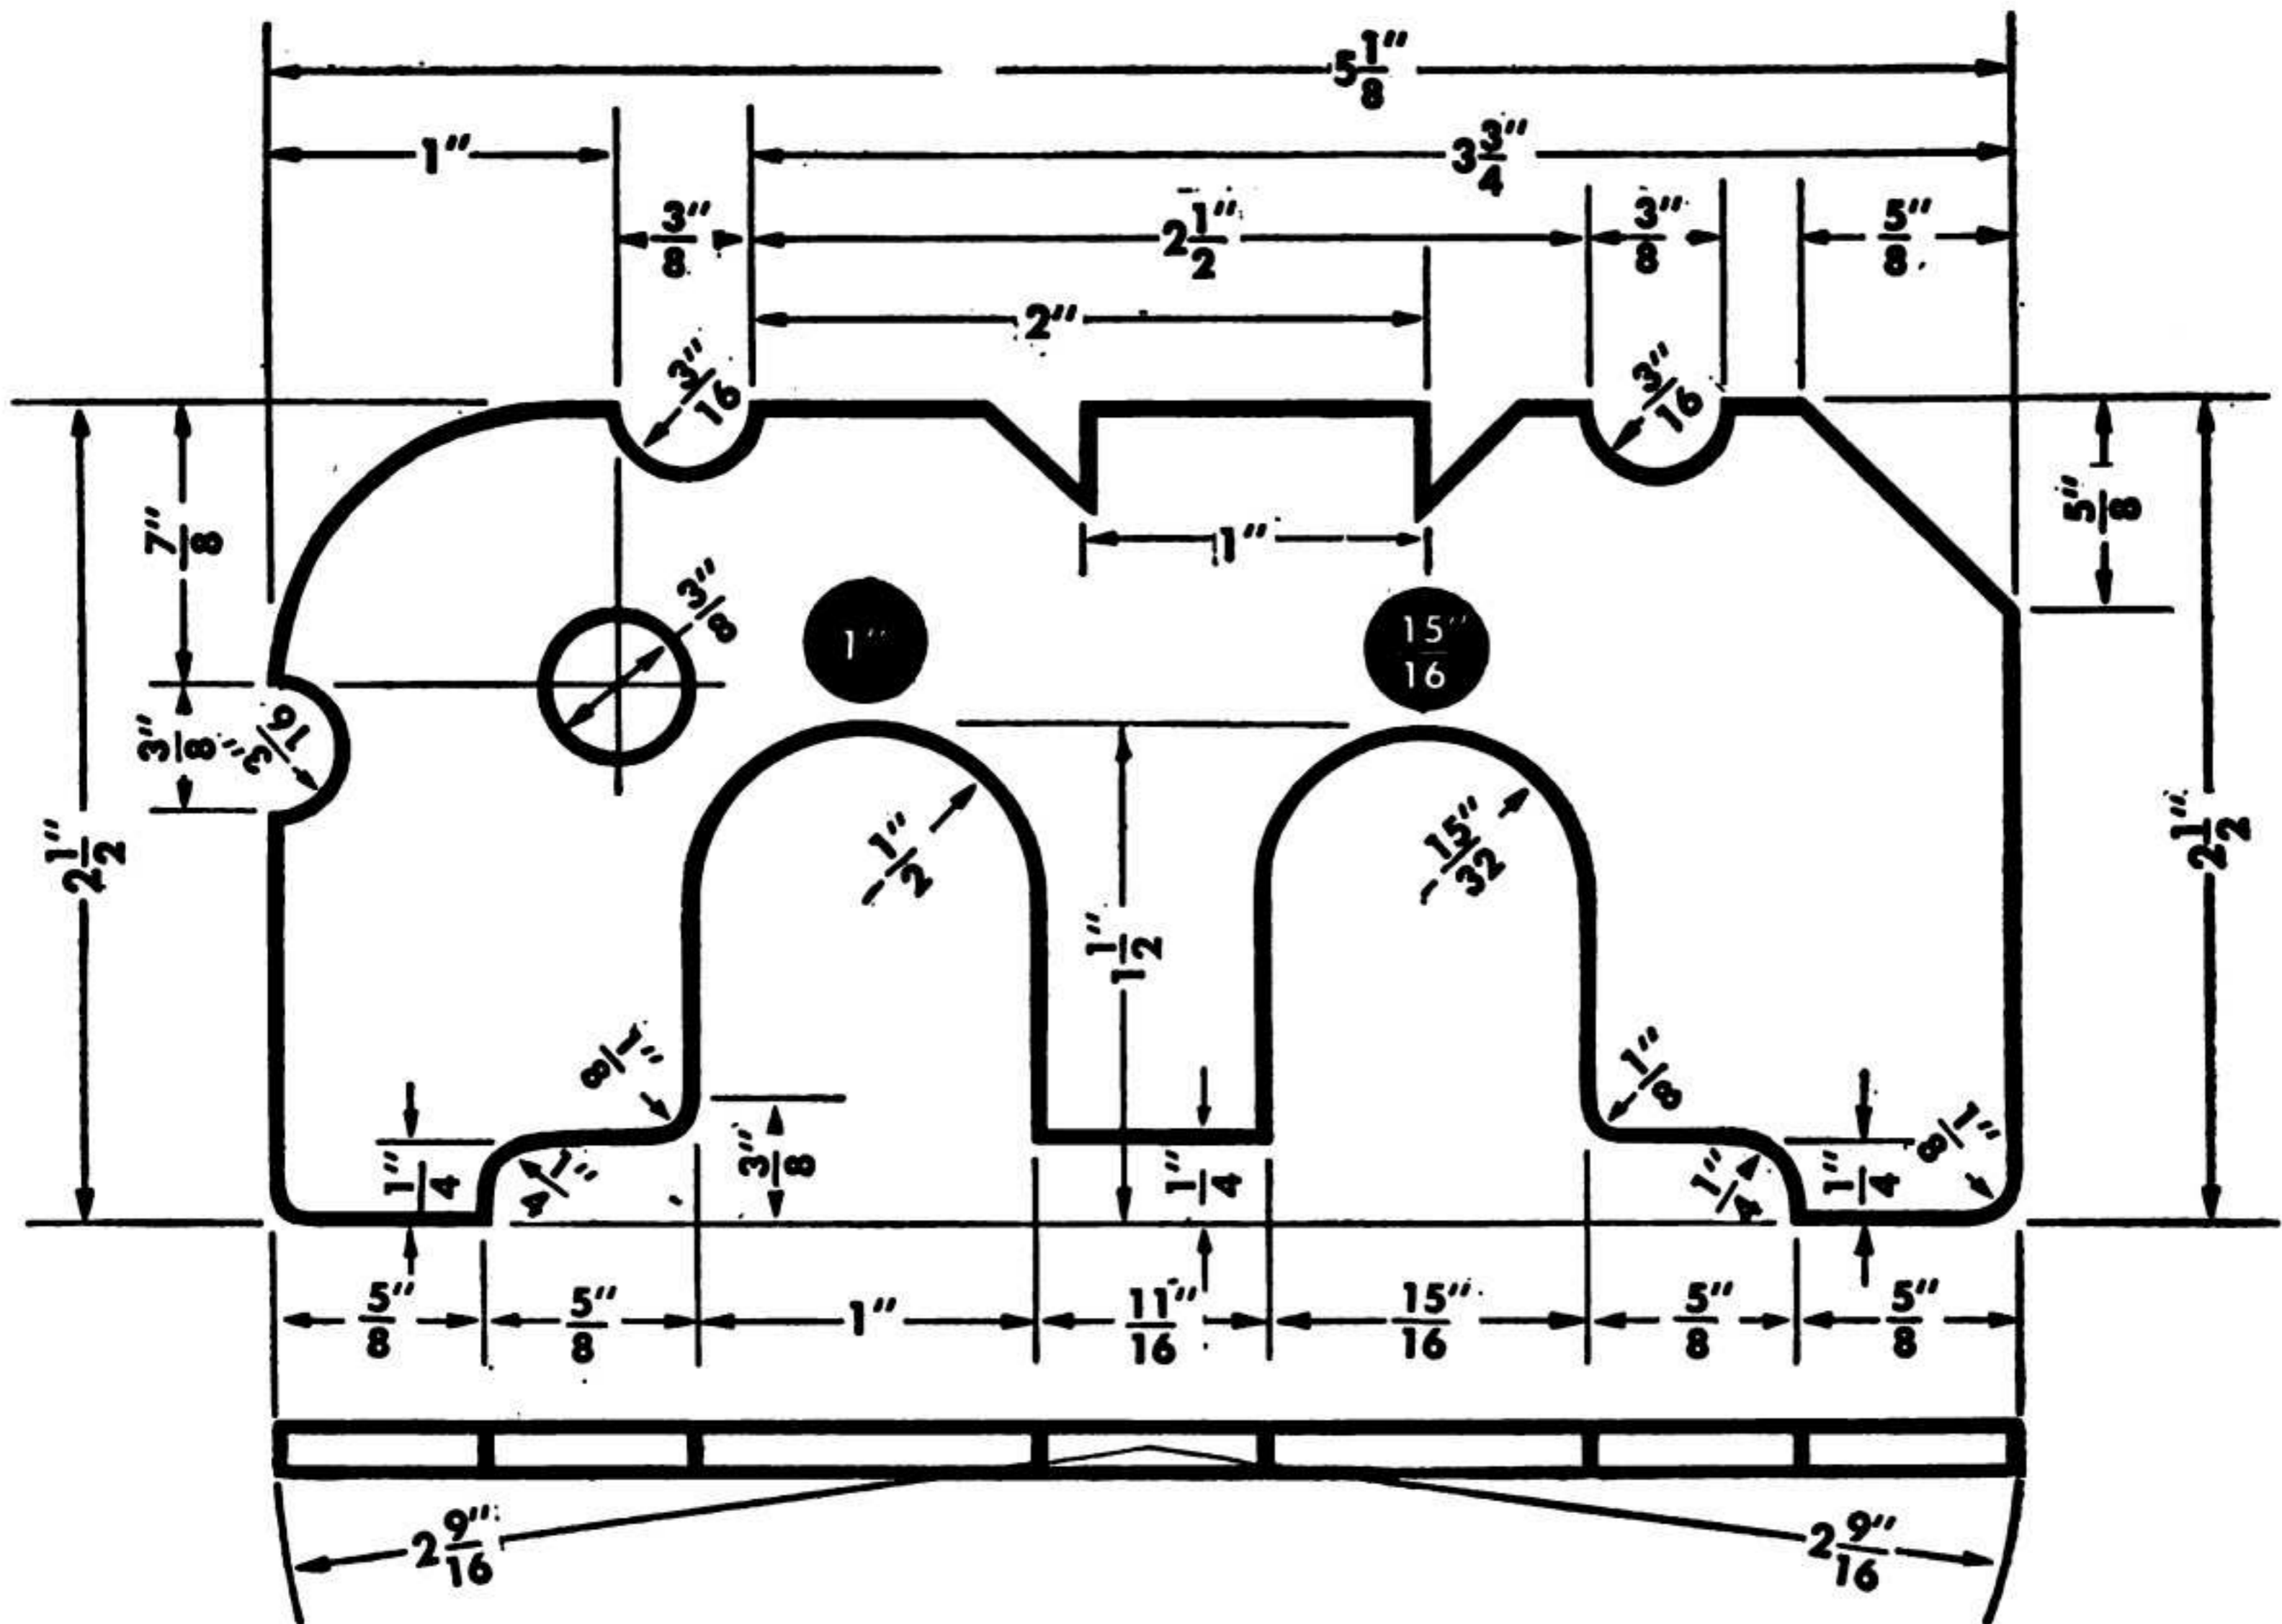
Wheel Defect Gauge (TC Stock No. 41-4012-19-020). This gauge to be used in determining flat spots, worn flanges and broken rims.
